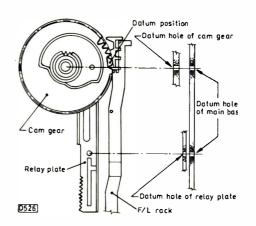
Datum positions of the relay plate and cam gear.
